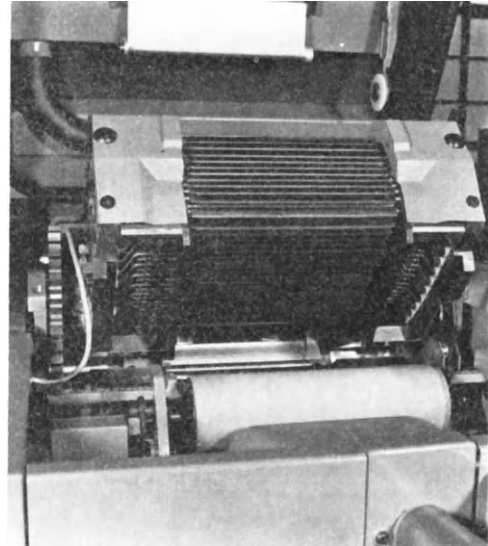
Chain gill box. This close-up of the chain gill mechanism, with the top head raised, clearly shows each pinned 'faller' and the crank at each end which controls the pin angle. The pin length is shorter than for a screw gill box; with clean material of good fibre length the production rate may be up to 400 kg/h. Courtesy of N. Schlumberger & Cie
